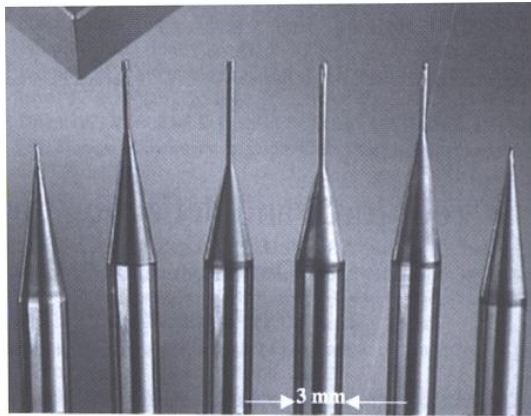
Micro-milling tools (Jabro Tools Ltd, n.d.)
